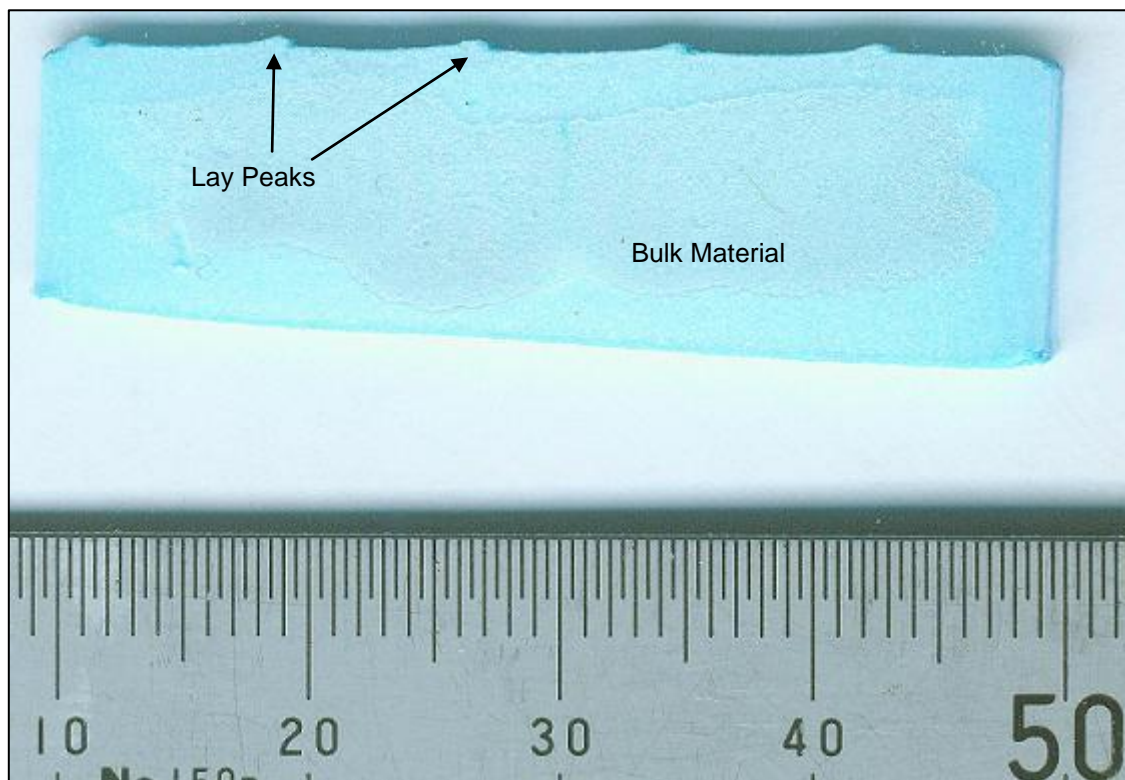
Sectioned view showing lay resulting from multi-pass cutting of a flat surface (8mm square-nose tool, 8mm path spacing)
